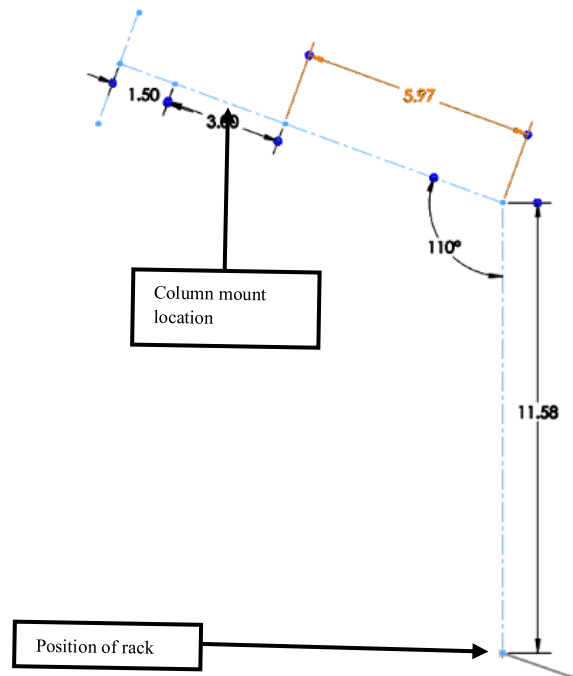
SolidWorks sketch I made to give me the dimensions of where the steering column mount is relative to the steering rack position
